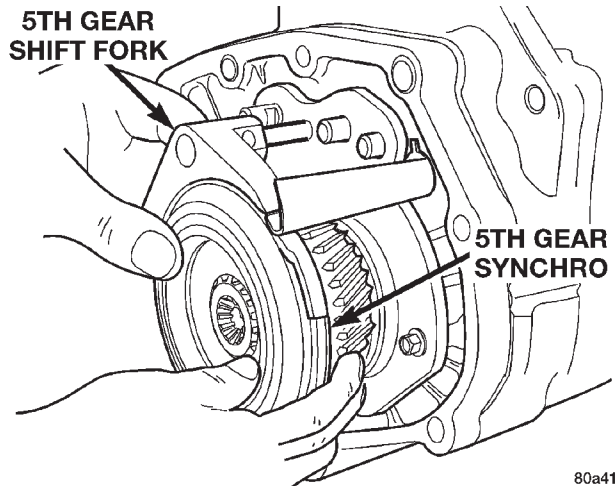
5th Gear Shift Fork, Rail, and Synchronizer
